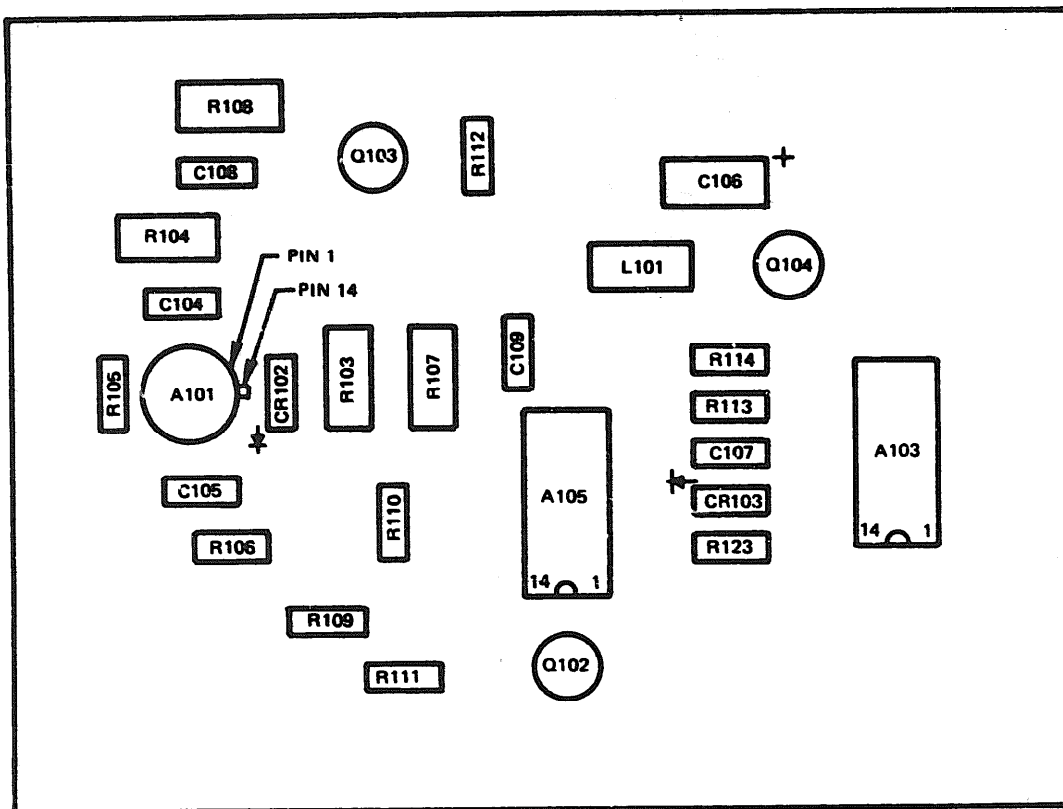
Autorange logic printed circuit board HTA-3A9A1A4, parts location
